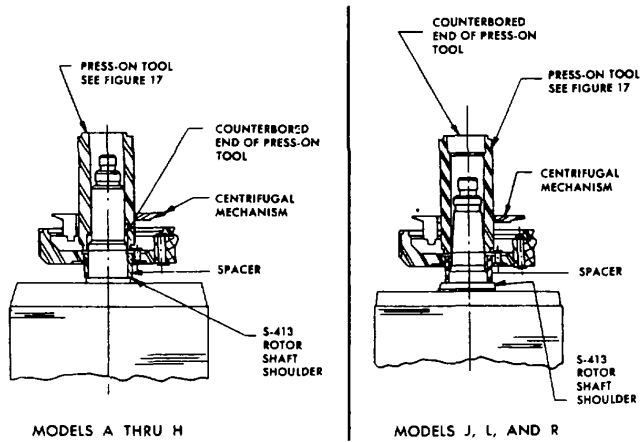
CENTRIFUGAL MECHANISM ASSEMBLY
